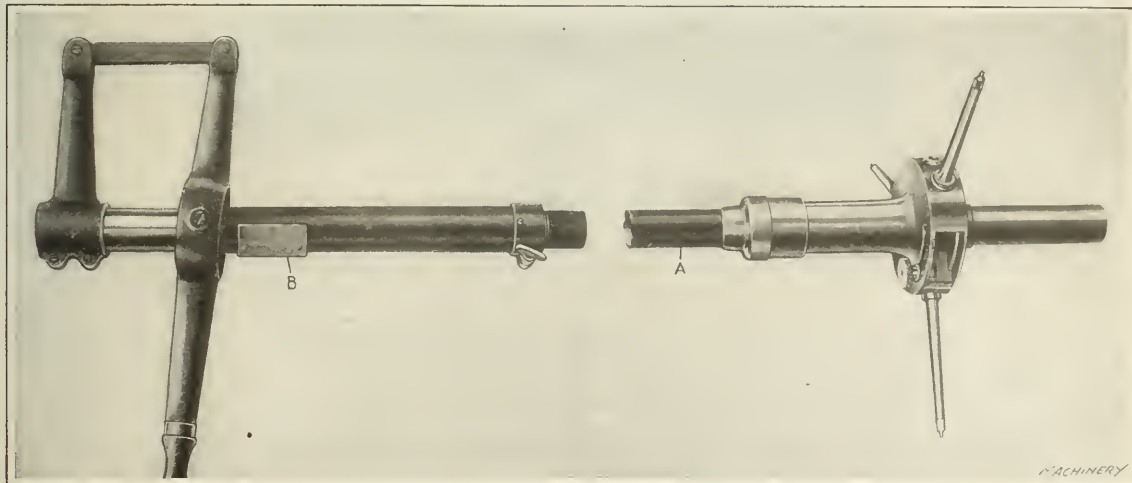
Pratt & Whitney Star Gage with Three-point Measuring Head
